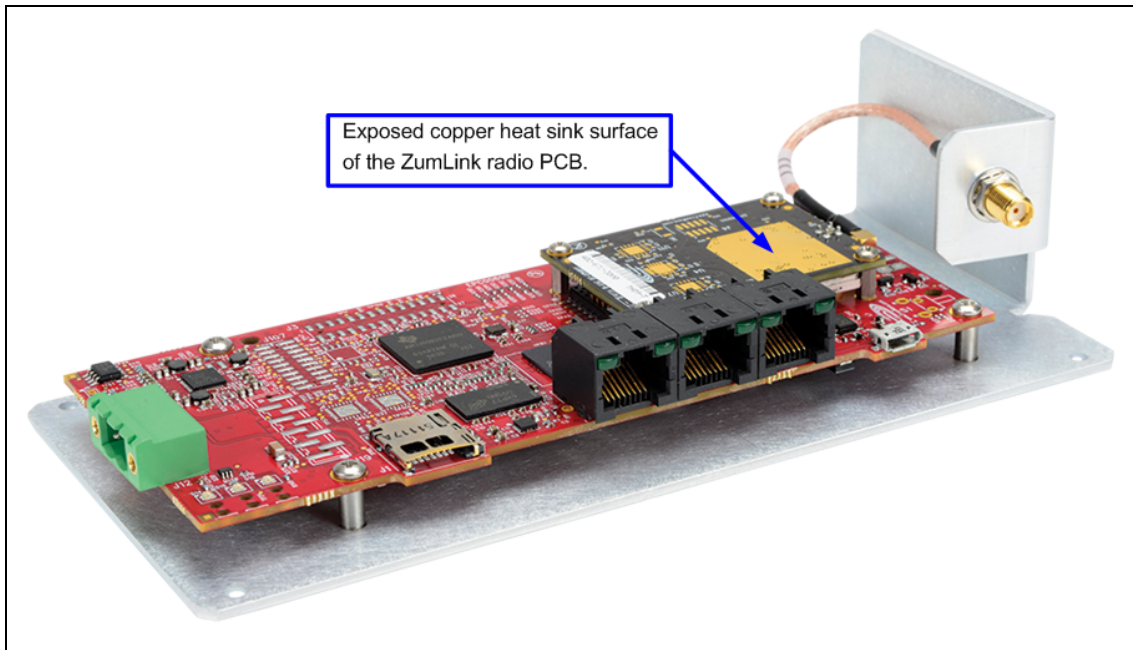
Exposed copper heat sink surface of the ZumLink Z9-P radio PCB.
